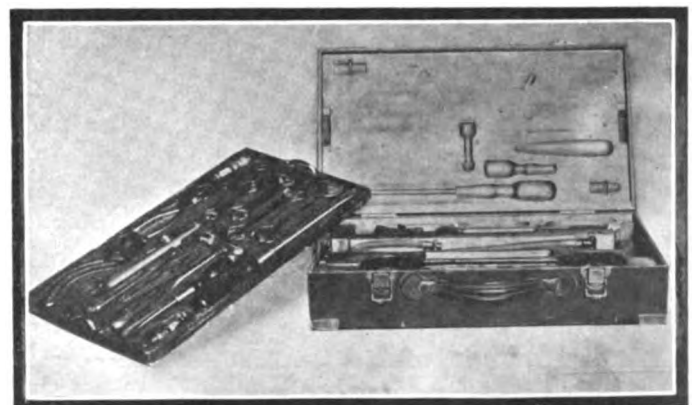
Showing the top tool tray removed, giving easy access to the lower part of the case
